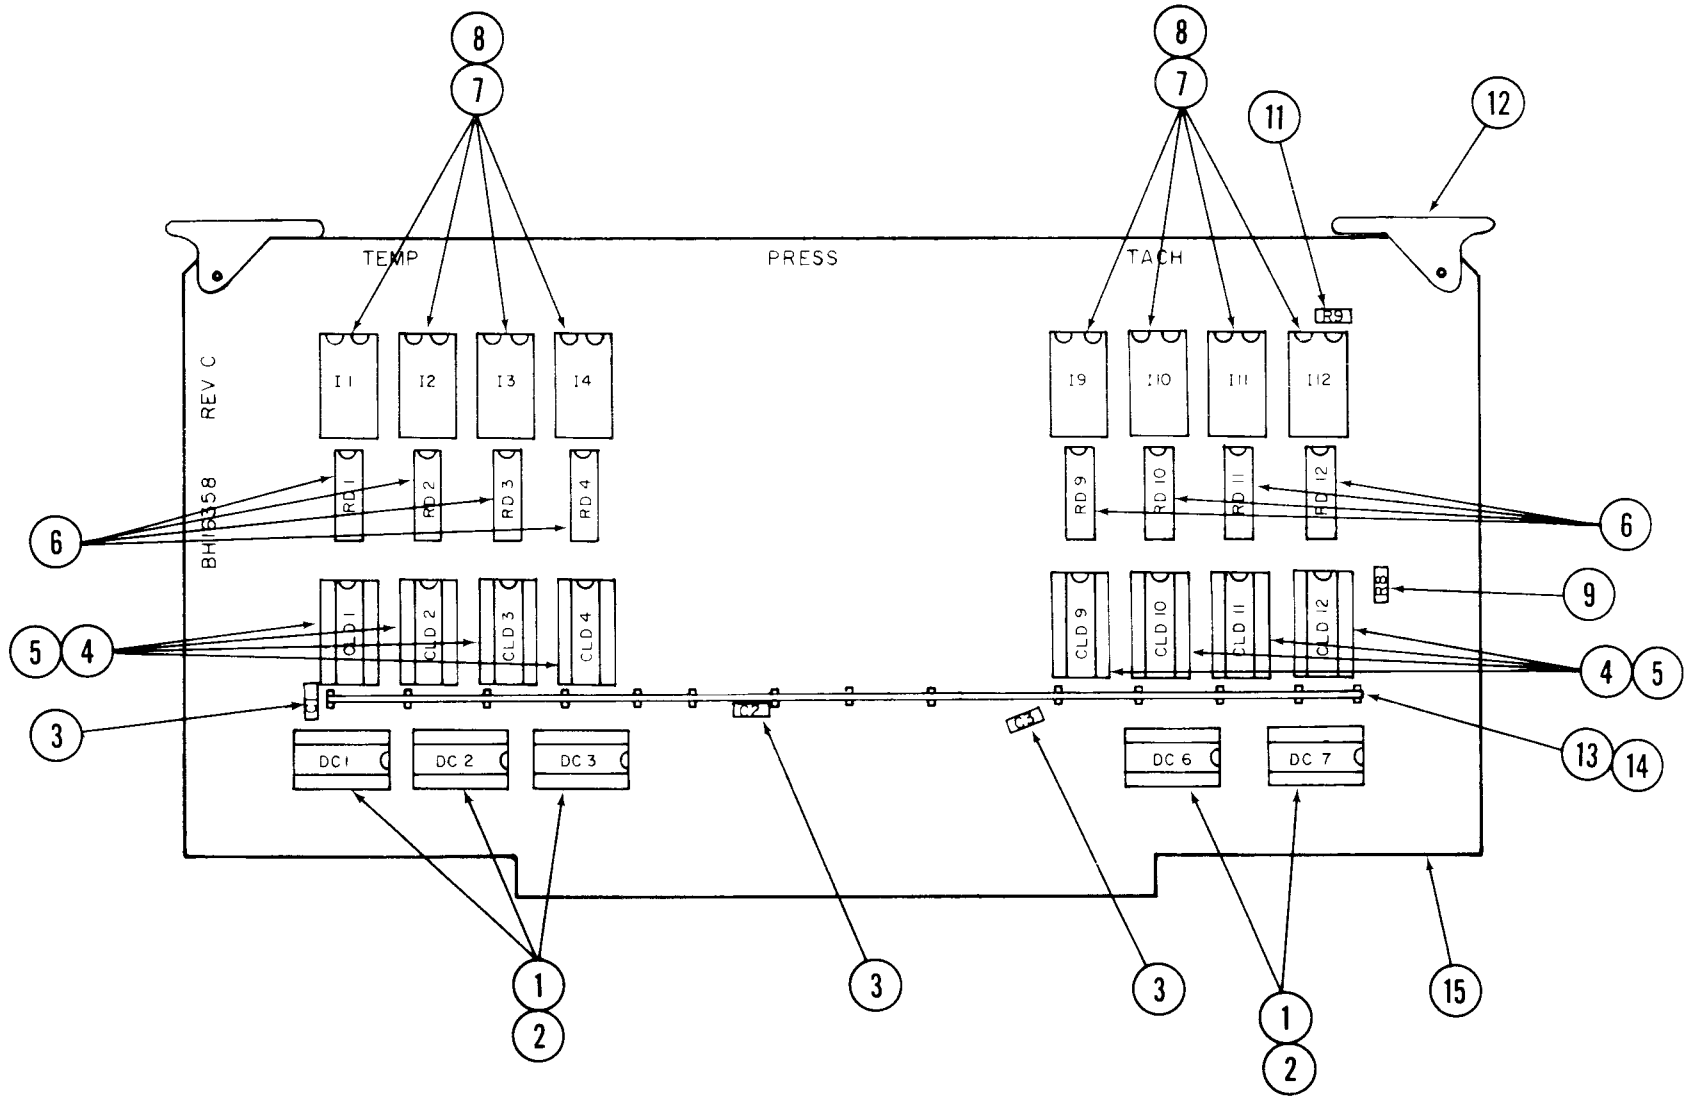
BH16358-2 Display Circuit Board Assembly.
